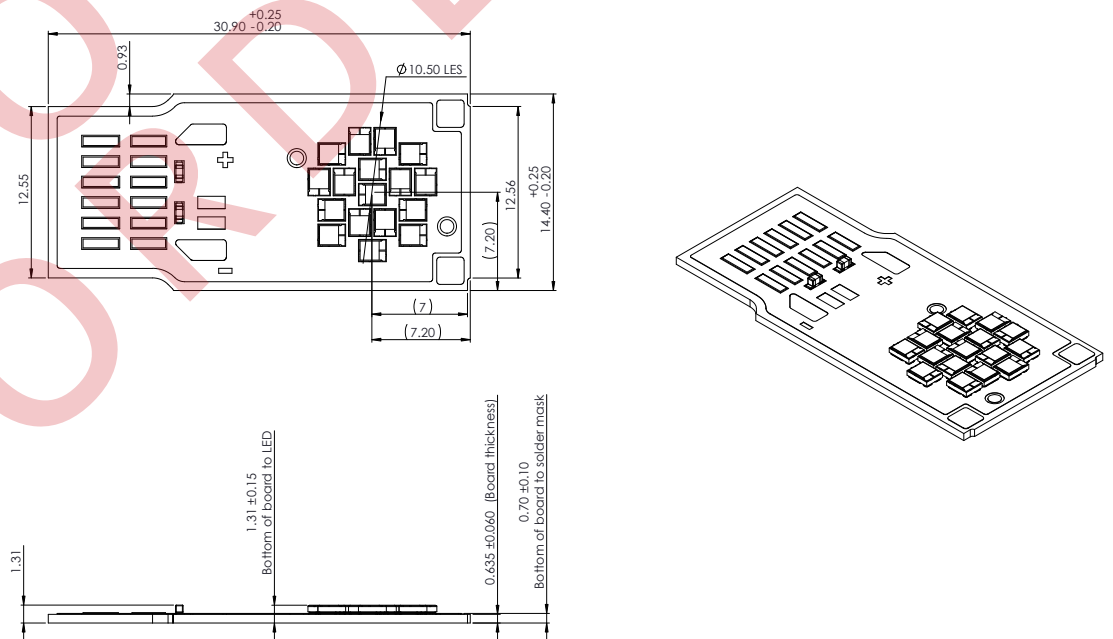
Package outline drawing for LUXEON S2000 / LXSx-Pxxx-0017N (Connector-less).
